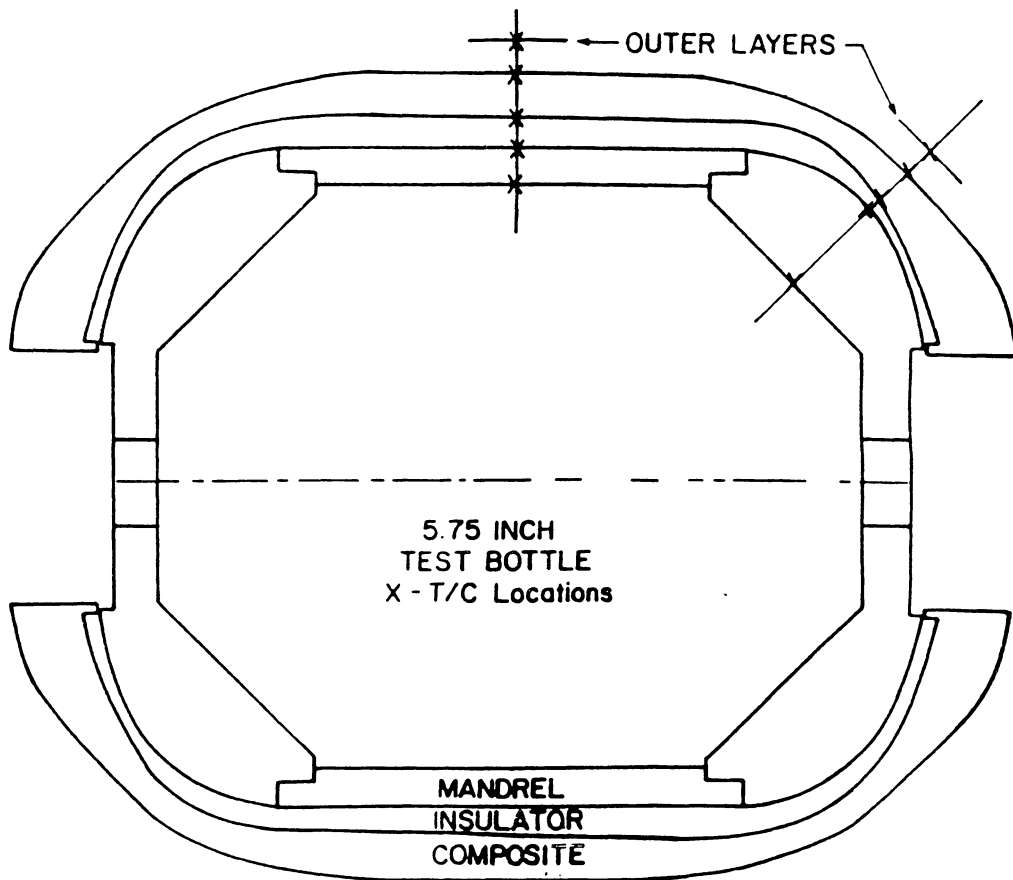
Schematic of 5.75 Inch Bottle Assembly:
